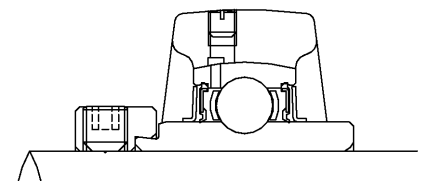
Lubrication-free type insert bearing unit (Steel-plug filled specifications)
